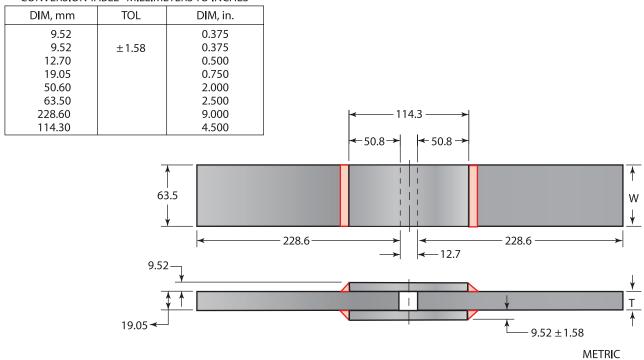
Transverse fillet weld shearing specimen after welding.
